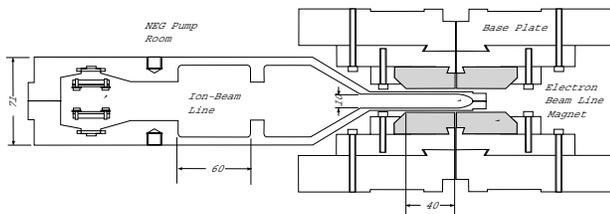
Cross section of the vacuum tube inserted in between the magnets.
